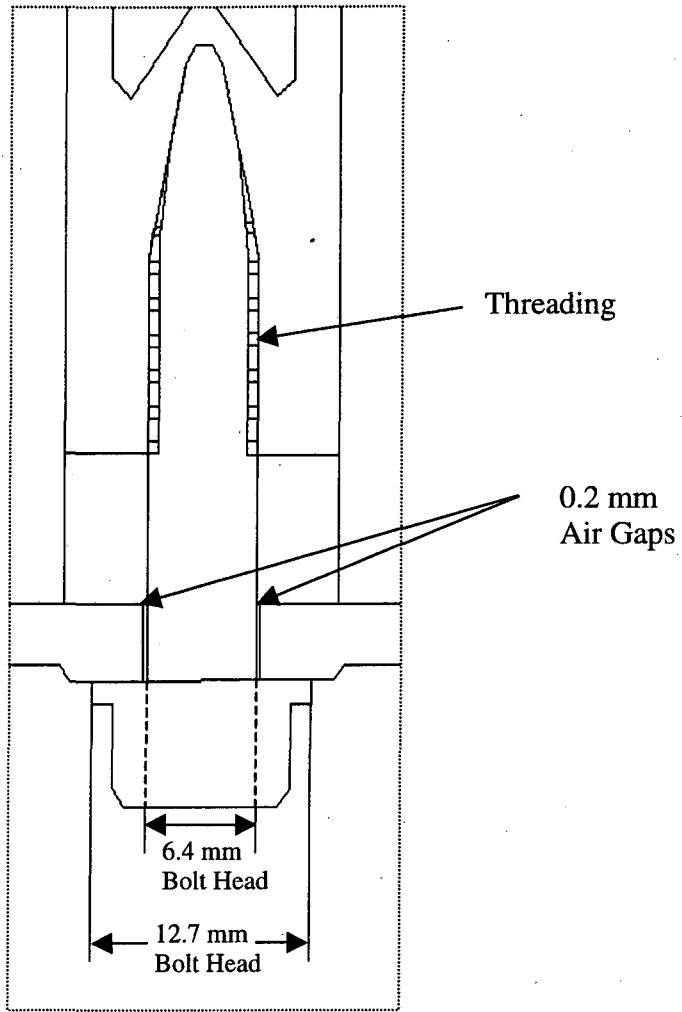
Warm side view of specimen mounting configuration for thermal tests.
